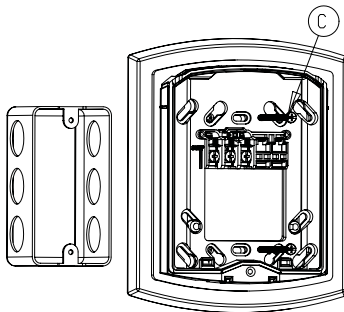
Assembly Attachment to 2  $\times$  4-inch-Back Box
